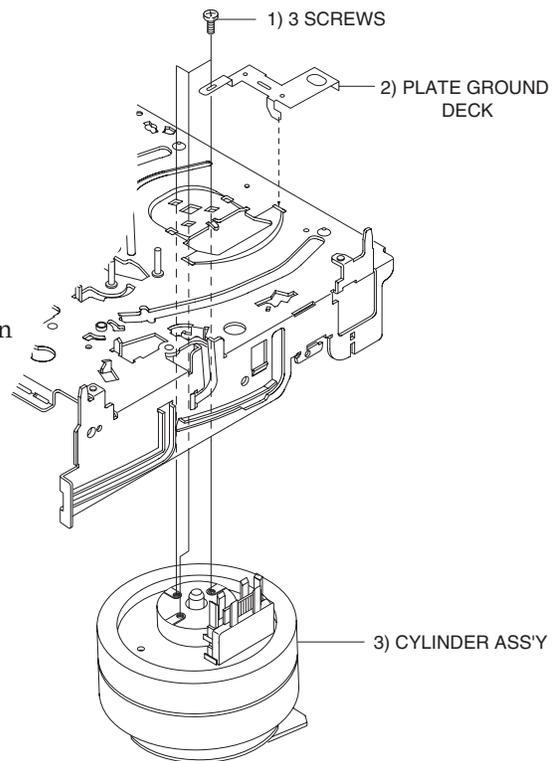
Plate Ground Deck, Cylinder Ass'y Removal
